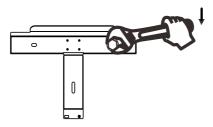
Fastening the mounting bracket onto the supporting structure
